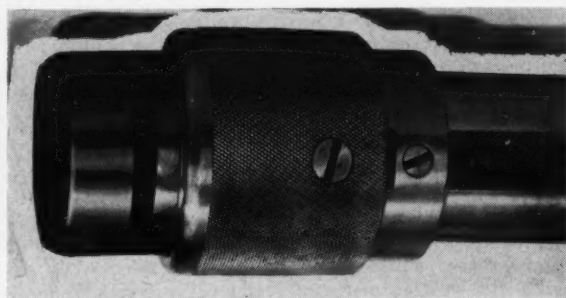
Seal clamped in inserting tool. Blade has contacted filler ring inside seal. The seal is cut away for illustrative purposes
